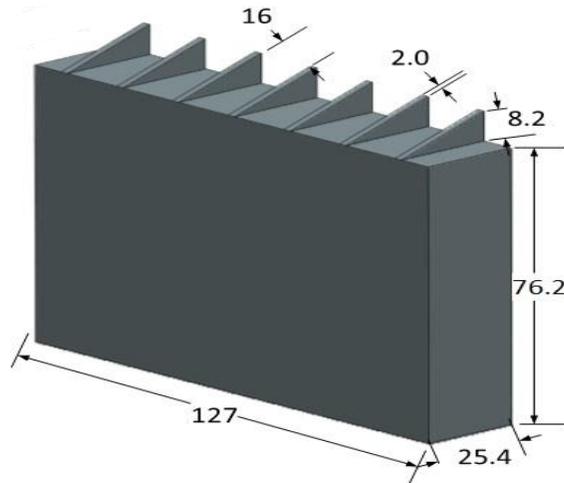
STRAIGHT SPOILERS (ALL DIMENSIONS IN mm)
